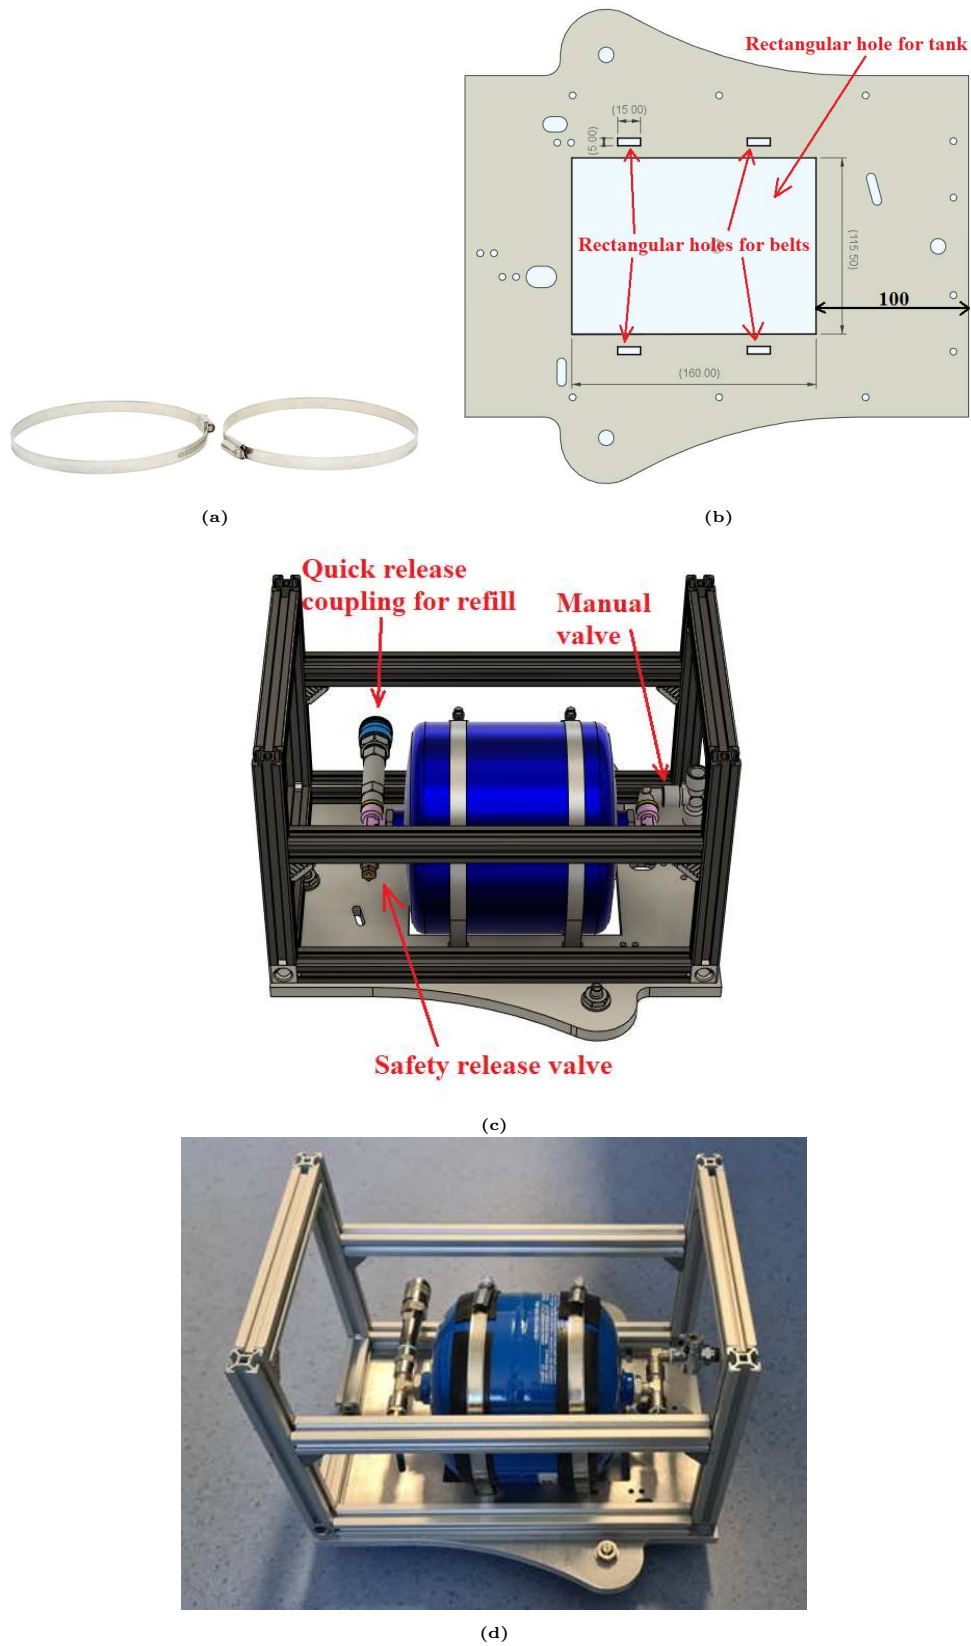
(a) Belt supports, (b) rectangular holes on the bottom wall, (c) CAD model and (d) assembly of the mounted tank.
